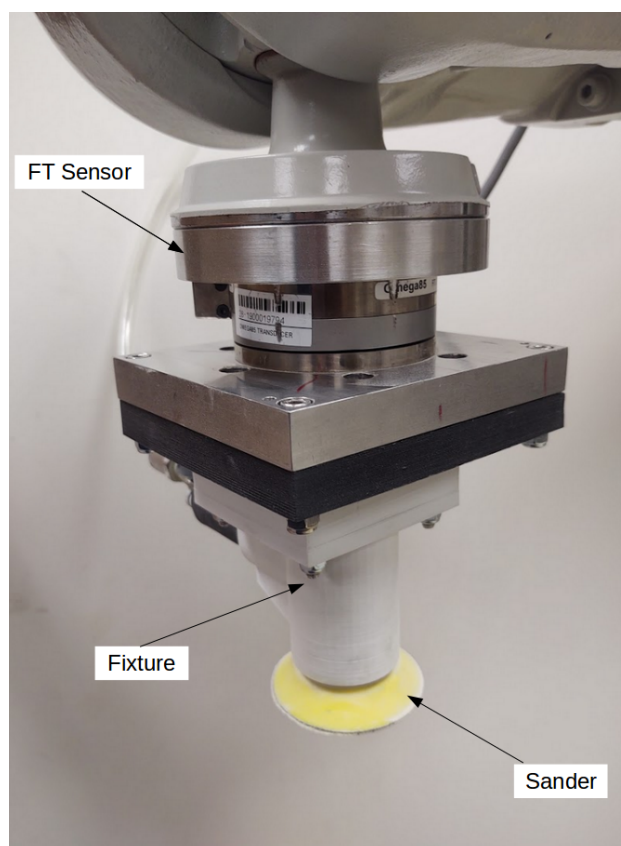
FT sensor, fixture, and sander mounted to robot end-effector
